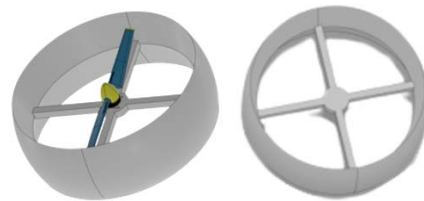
Faring 3D model developed in DS CATIA. Left: propeller assembly composed of fairing, electric motor, and propeller. Right: propeller fairing before being machined.
